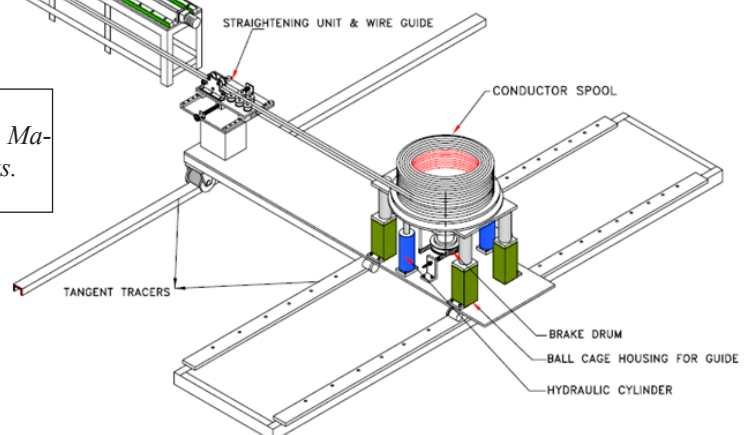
A Special Purpose Winding Machine towards fabricating prototype magnets.
